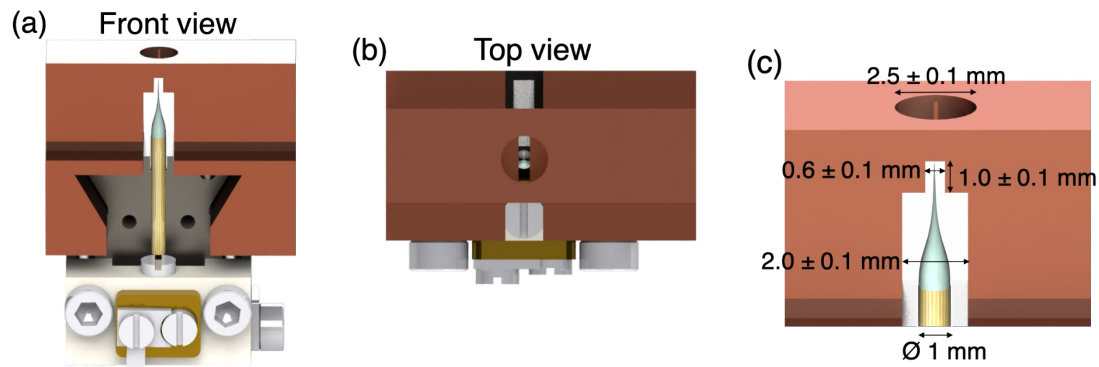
Illustration of the deposition holder and sensor holder with dimensions indicated in (a) front view, (b) top view, and (c) a closer view of the tip inside holder slit.
